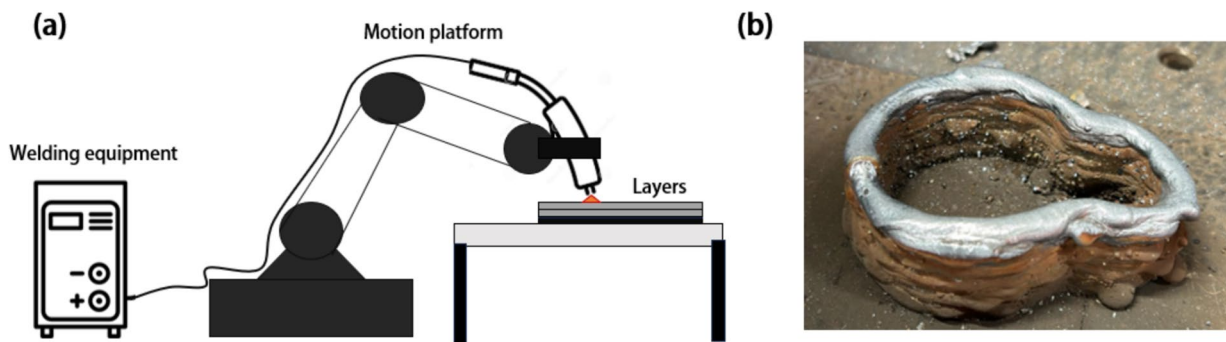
a Main components of a robotic wire arc additive manufacturing system; b near net-shape produced component
